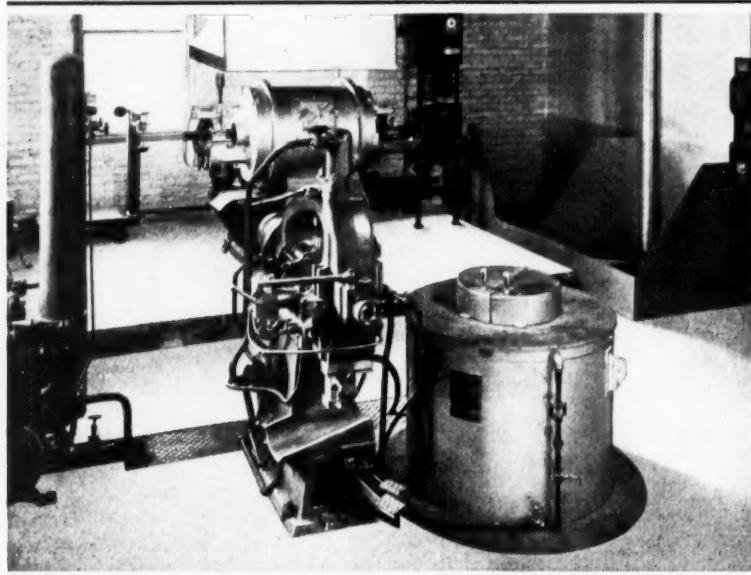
General View of a Brass Die-casting Department Showing the Die-casting Machine, Hydraulic Power Unit, and the Melting and Holding Furnaces
